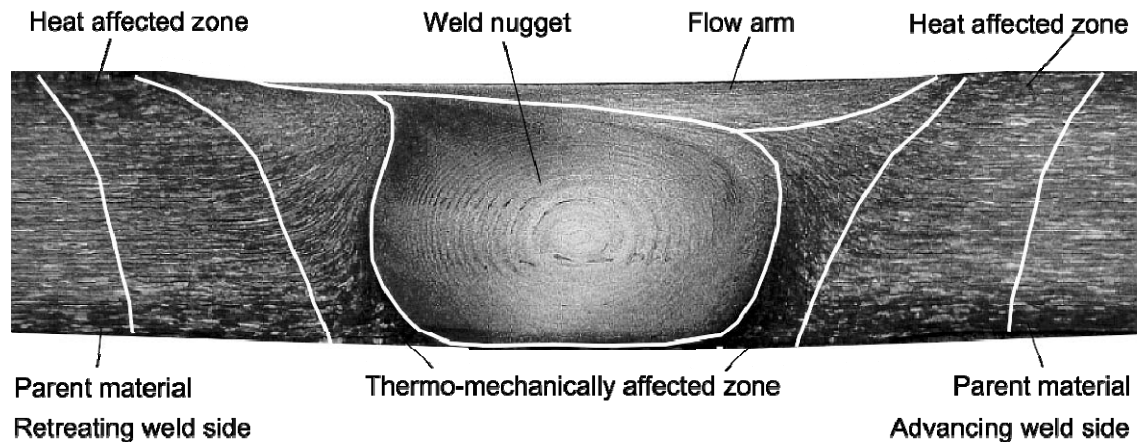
Cross-section (N-T plane) of a FSW showing the characteristic weld zones including the classical onion ring structure. This is a 10 mm AA6082 weld (Greitmann *et al.* 2005).
